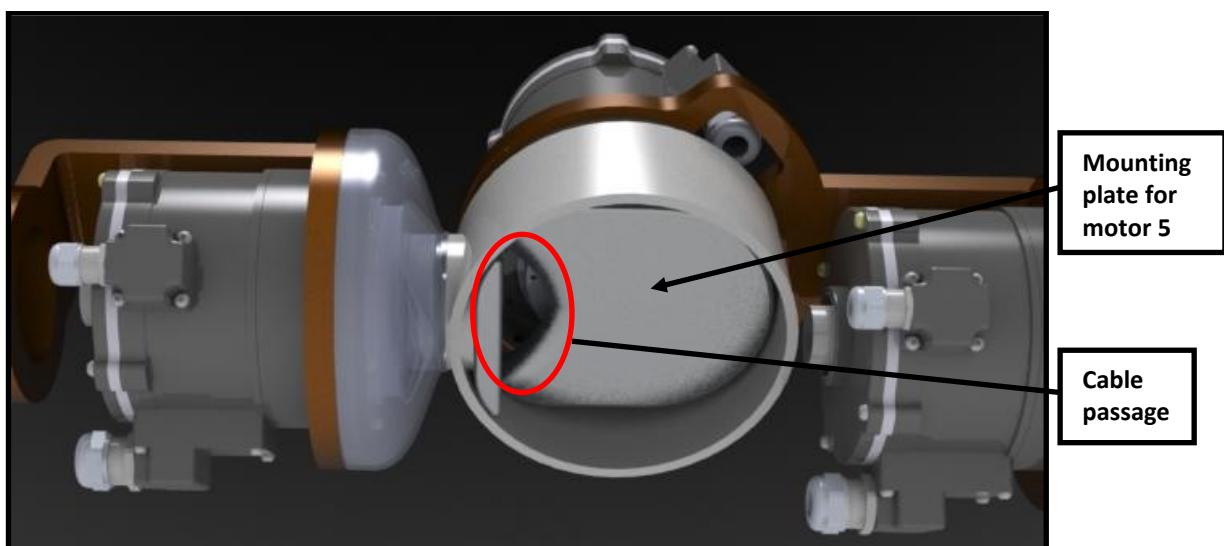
A closer look at the seal, and the mounting plate for motor 5.
